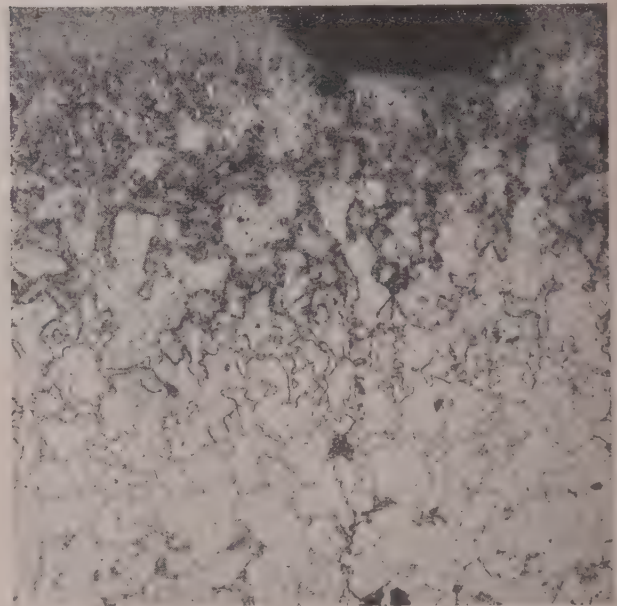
Enlarged cross section through stray flash in mild steel, showing severely hardened structure and fatigue crack starting from hardness crack
